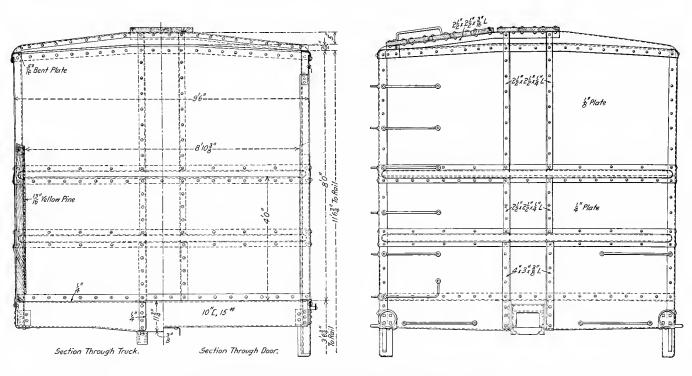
Cross Sections and End Elevation of Summers All-Steel 50-Ton Capacity Box Car, Similar to the Car Shown in Fig. 3. See also Figs. 263, 264 and 266.
